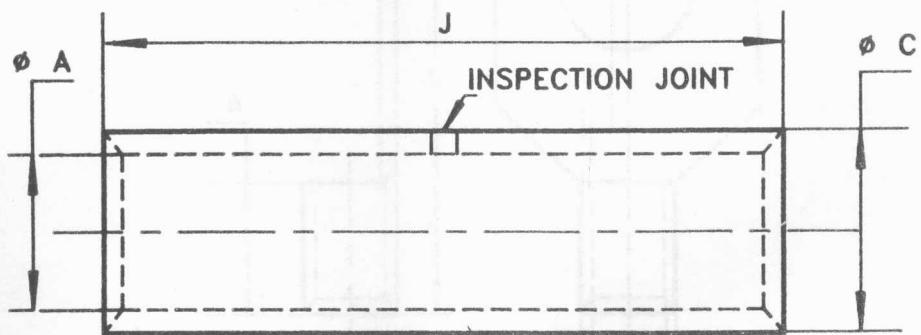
COPPER TUBULAR IN LINE CONNECTOR FOR SOLDERLESS CRIMPING TO COPPER OR ALUMINIUM CONDUCTORS
